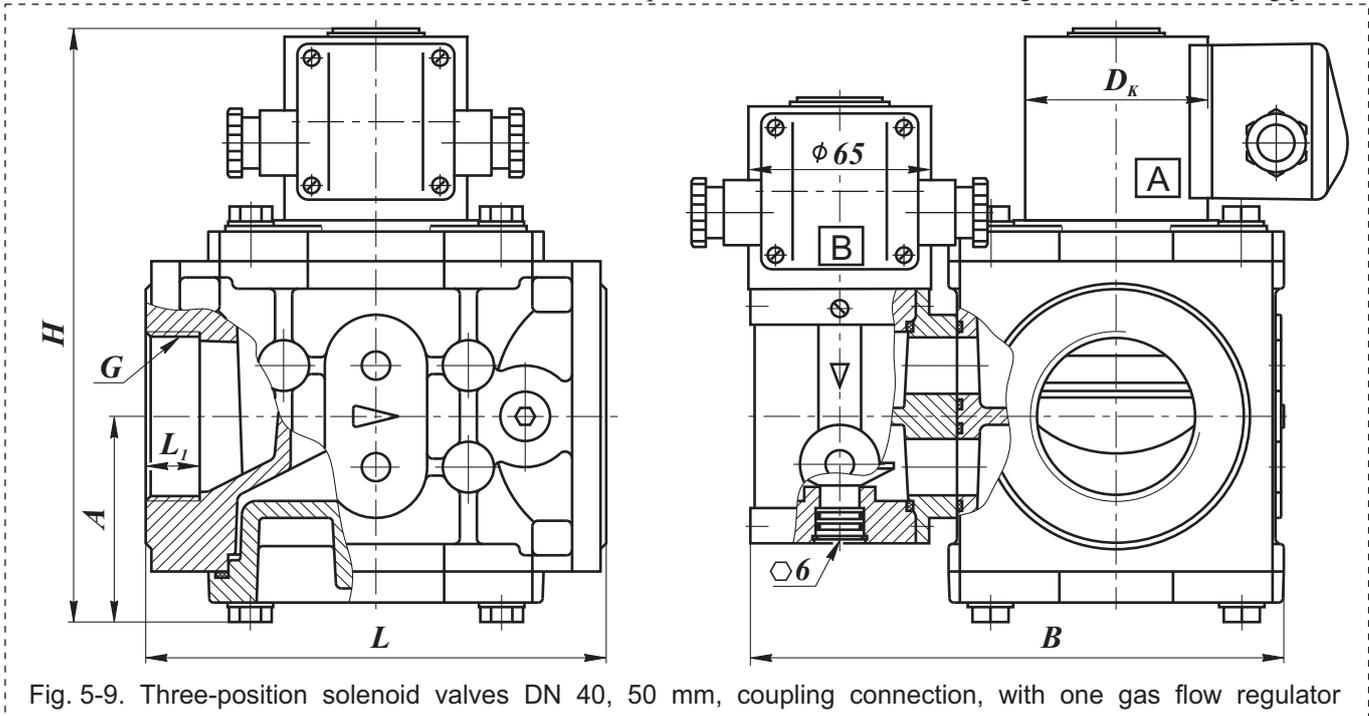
Three-position solenoid valves DN 40, 50 mm, coupling connection, with one gas flow regulator
